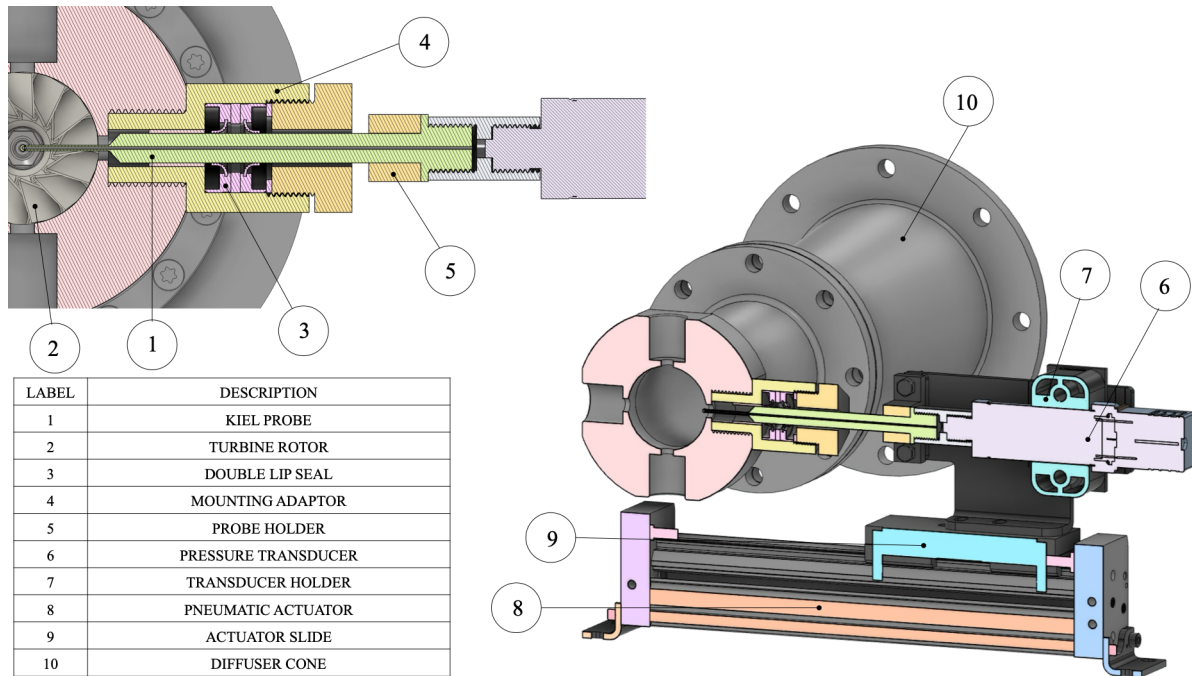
Cross-sectional view of the total-pressure measurement system integrated into the ORCHID turbine. The main view shows the complete assembly with the probe fully retracted, while the inset provides a detailed view of the probe-transducer assembly, sealing system and mounting interface with the probe fully inserted.
